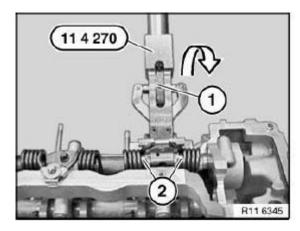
Identifying Bearing Pins And Knurled Screw Courtesy of BMW OF NORTH AMERICA, INC.
